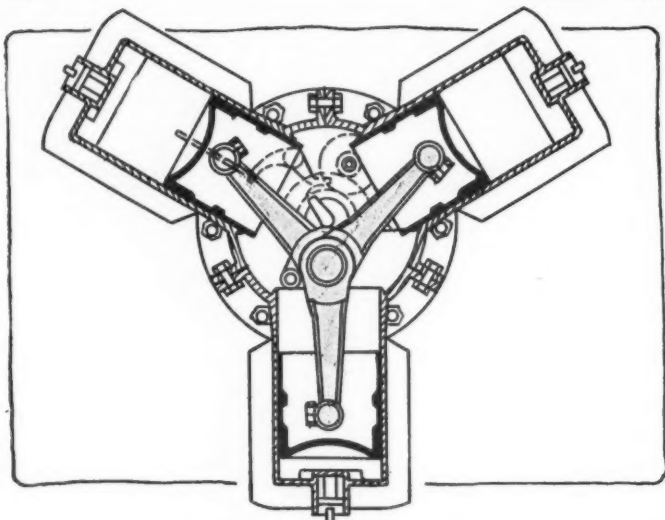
Motor with rotating cylinders. This is an Adams-Farwell automobile motor. Cooling is by air, the circulation being provided by the movement of the cylinders
